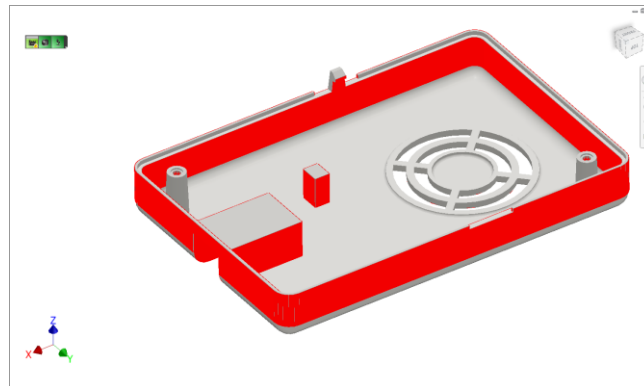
MOLDFLOW DESIGN: DRAFT ANGLE
